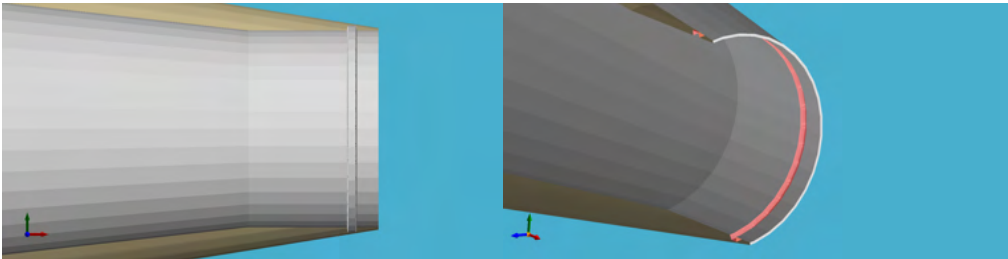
(Left) Cross-sectional view of the tripped primary nozzle. (Right) Isometric view of the tripping location highlighted in pink.
